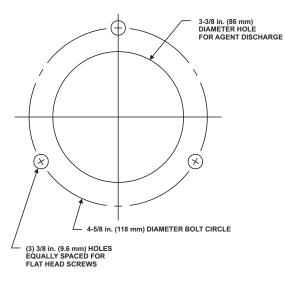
Flanged Nozzle Mounting Kit (Duct or Enclosure Mounting)
